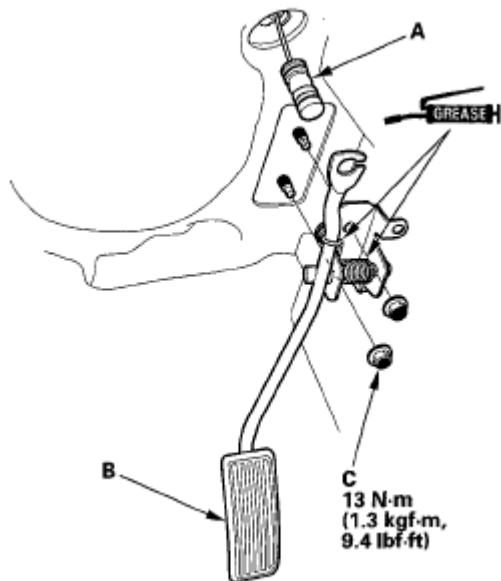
Identifying Throttle Cable And Accelerator Pedal With Torque Specification
